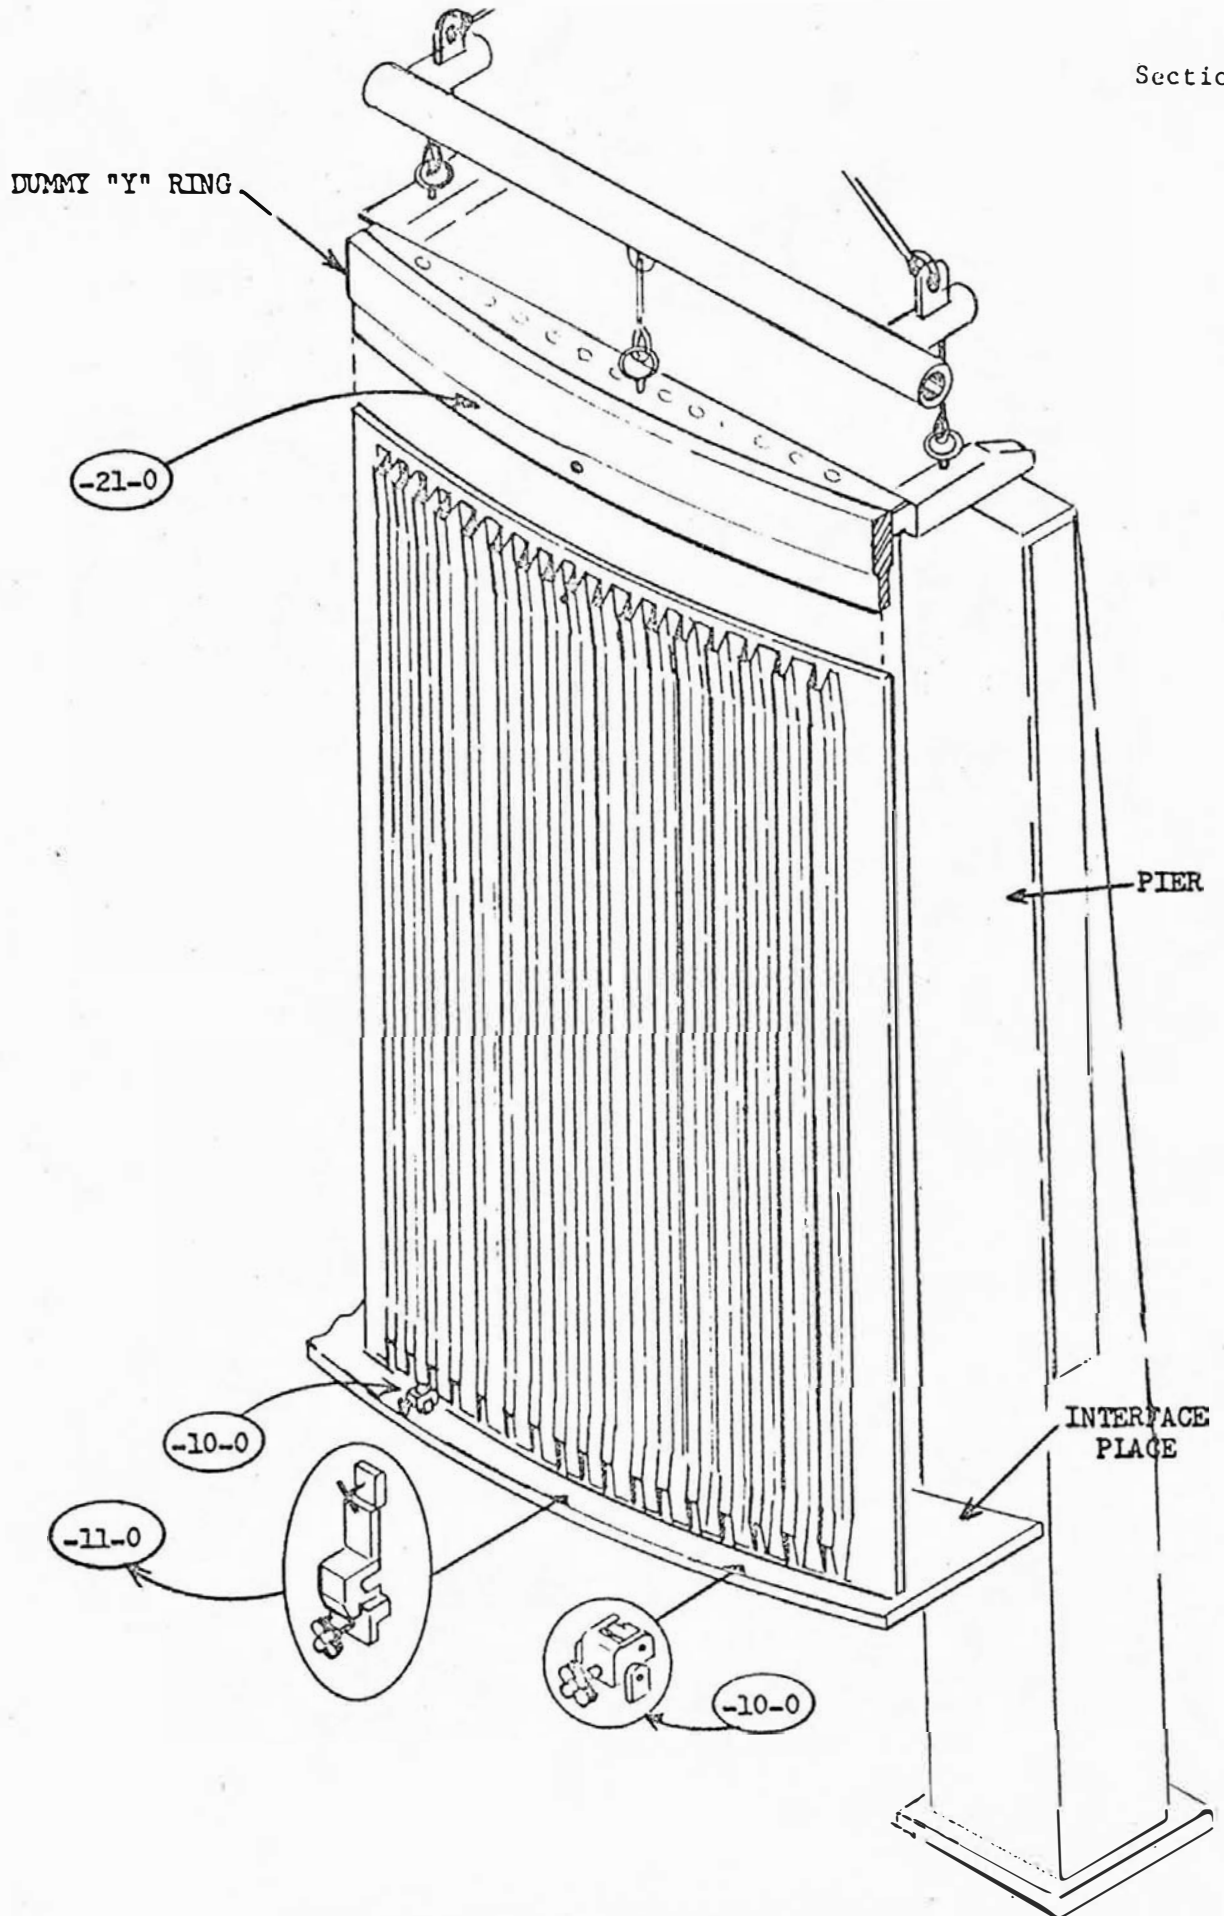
Locating Skin Segment Assembly on Assembly Fixture AF-B425-14000
